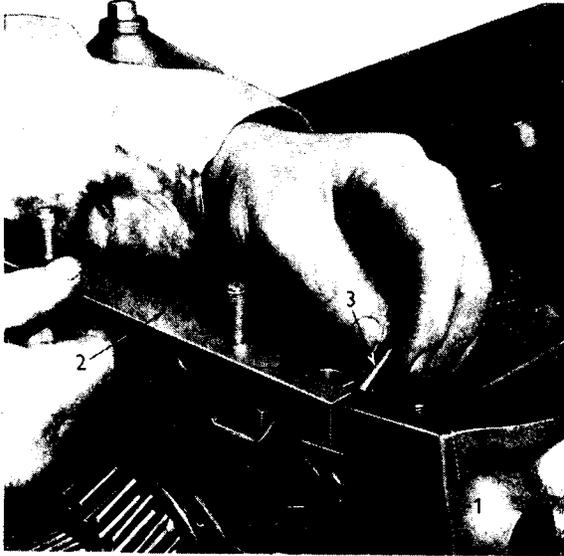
Fitting Main Bearing Bridge Piece Oil Seal.
